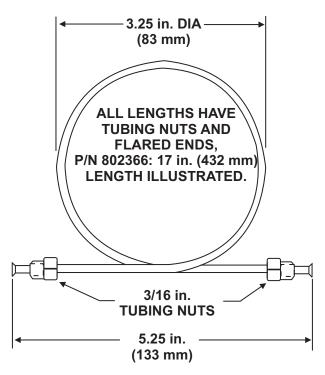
Pneumatic Detection System Tubing, 3/16 in.
